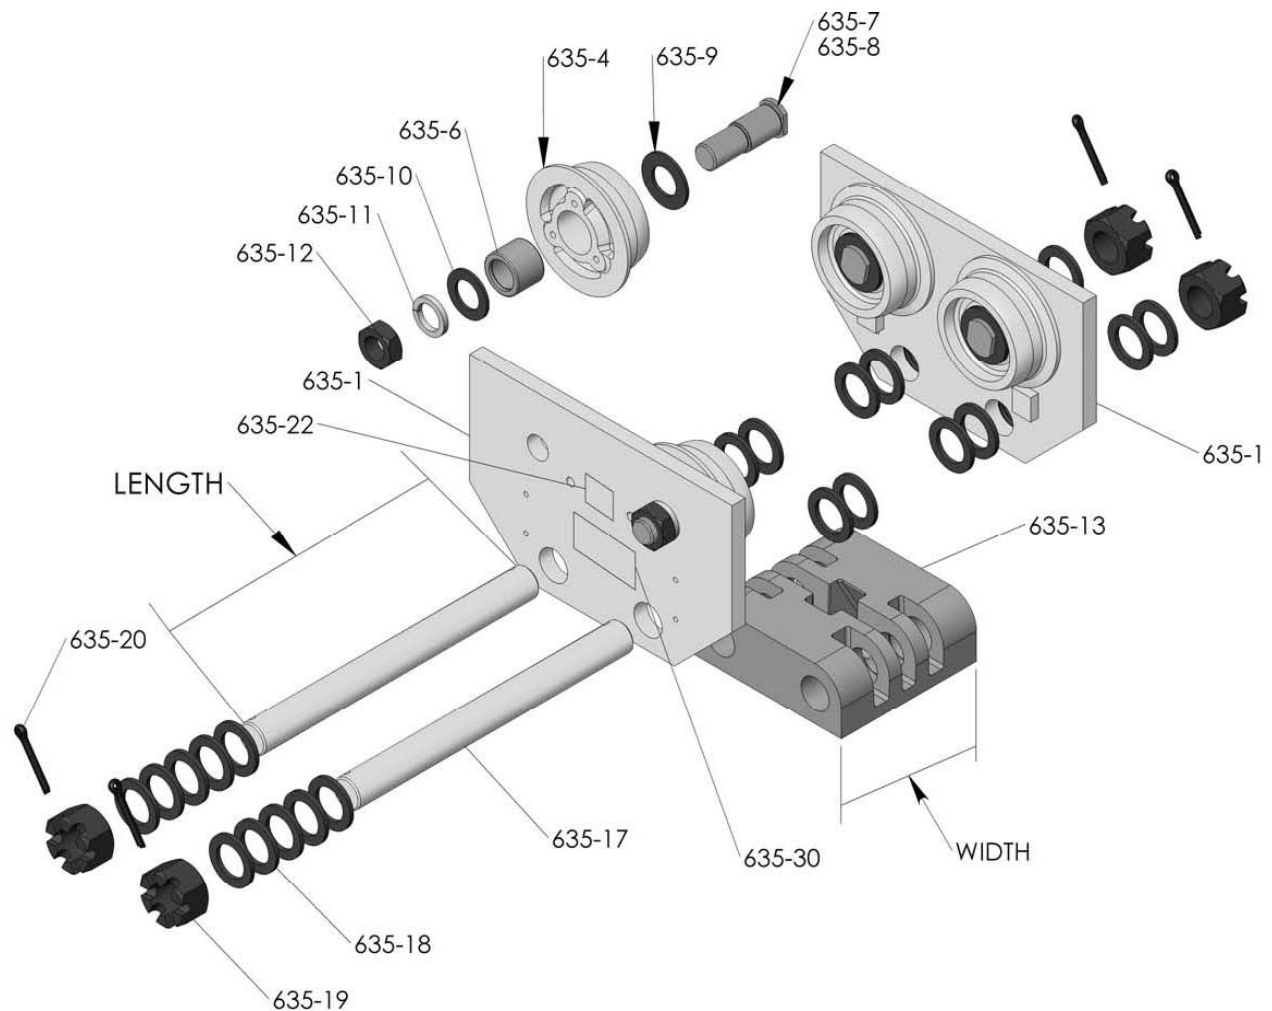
3 Ton Series 635 Low Headroom Trolley Exploded View
